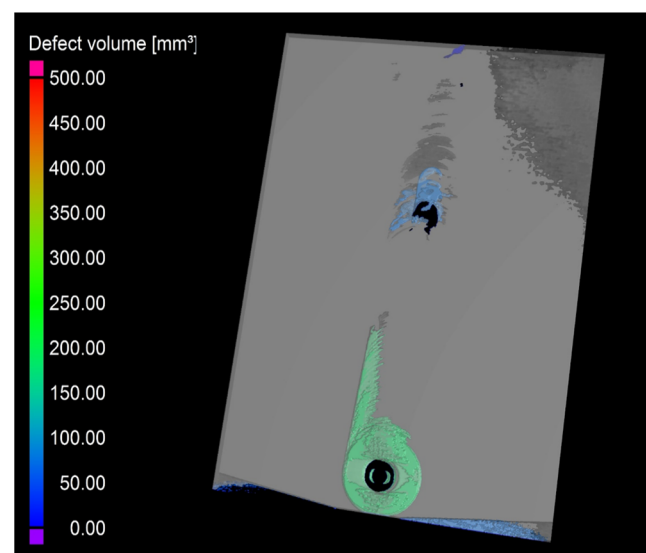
CT scan image of the weld sample showing the surface and internal defects for sample 1
